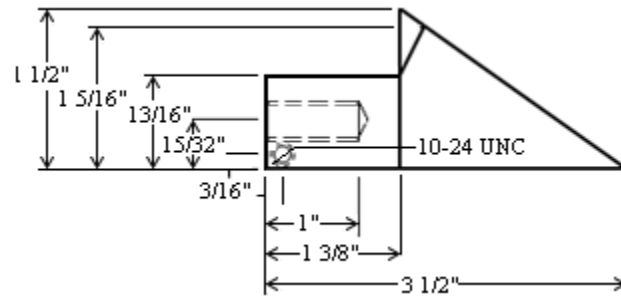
Side view Hook-SH5 (dimensions in inches).
